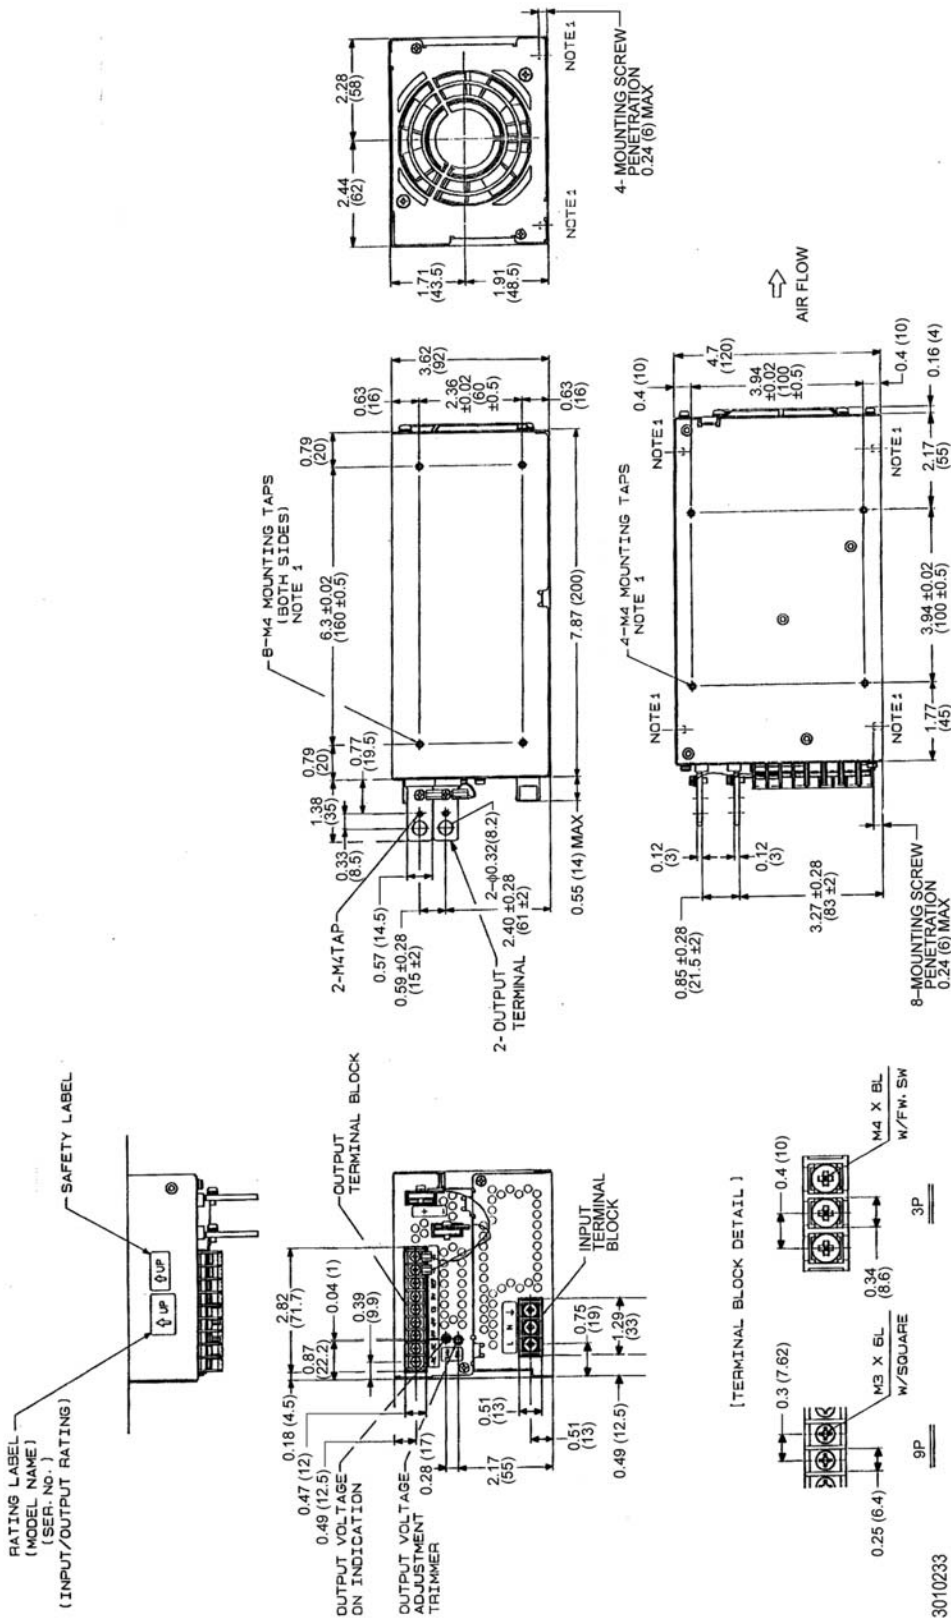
MECHANICAL OUTLINE DRAWING OF THE RKW 600W POWER SUPPLY
